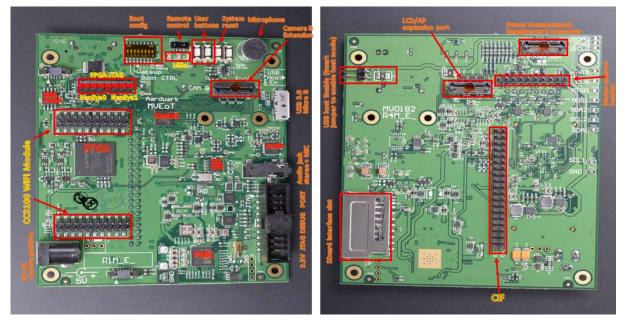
Manufactured EoT DevBoard; left: front view; right: rear view.
